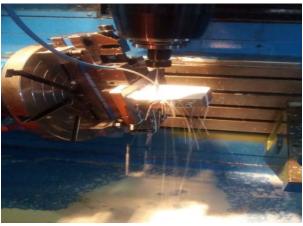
Machine tool C.B FERRARI P-46E in tests
